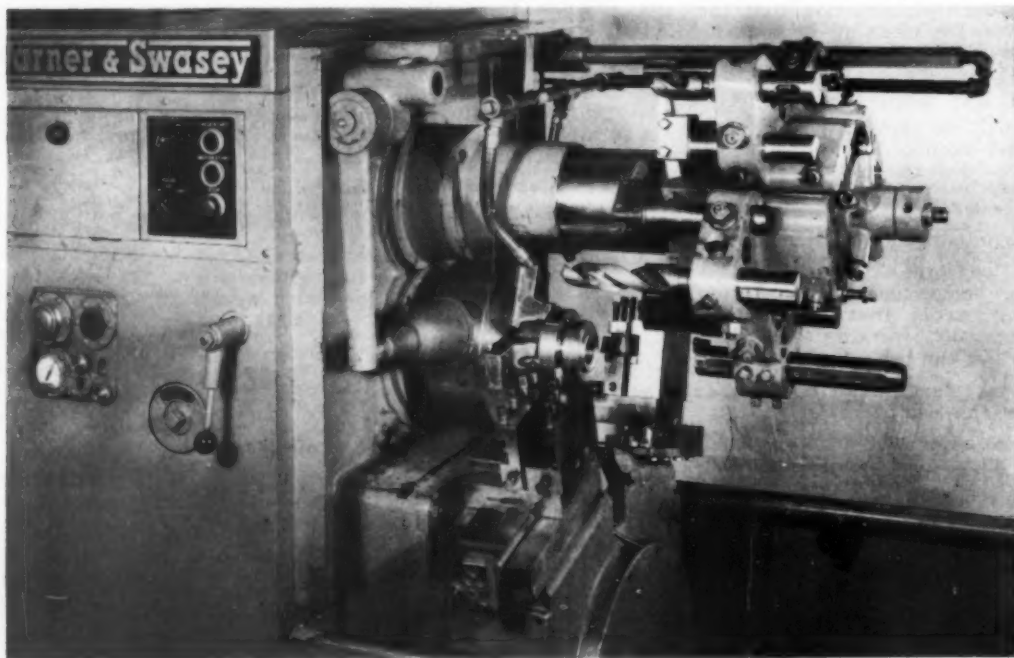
Single-spindle automatic - chucking automatic lathe. Actions of turret and cross - slide tools are electrically controlled through switch arrangements such as shown in Figs. 2 and 3
